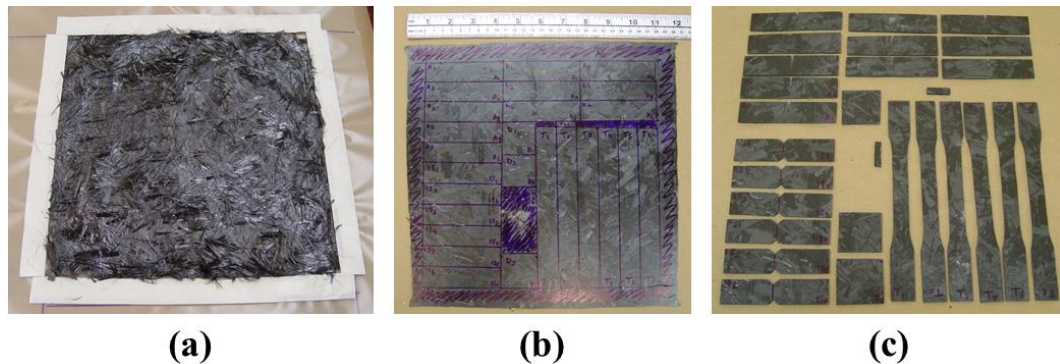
Fabrication steps of the carbon/epoxy samples with a) constrained, multi-layer impregnation b) cured panel c) machined test specimens.
